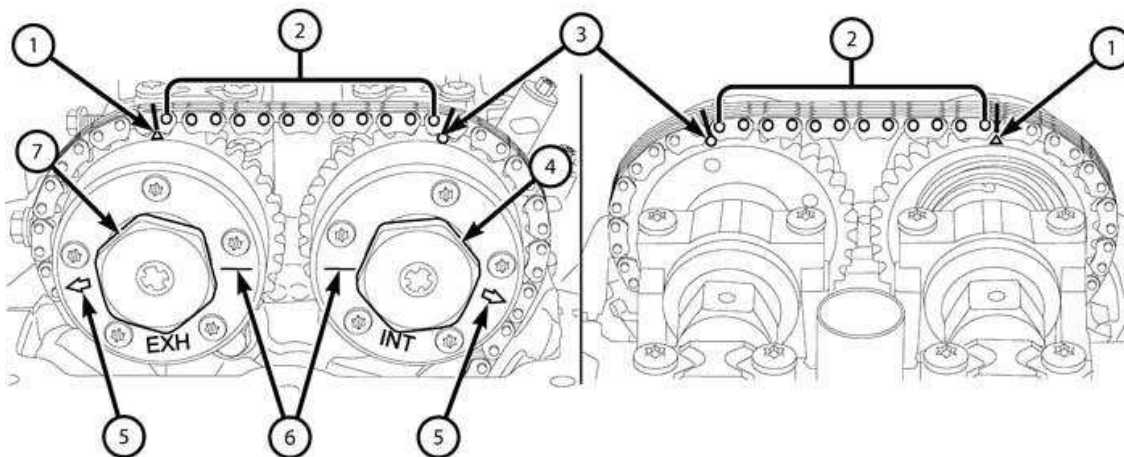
Phaser Timing Mark, Chain Pins, Exhaust Cam Phaser Triangle Marking, Oil Control Valve, Scribe Lines & Arrows
